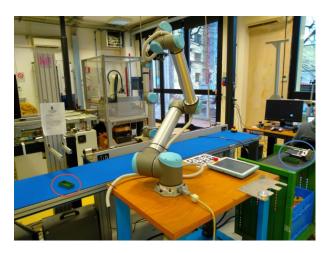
Experiment 1 layout. The blue circle is the disassembly station; red circle is the screw buffer
